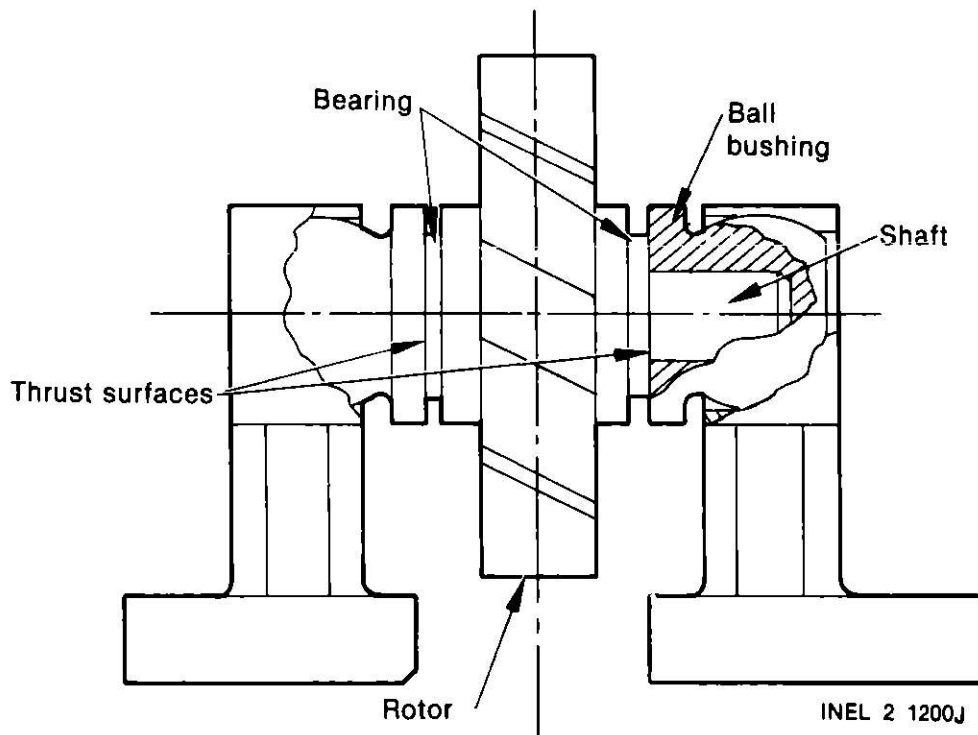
Turbine rotor and shaft support detailing self-alignment features.
